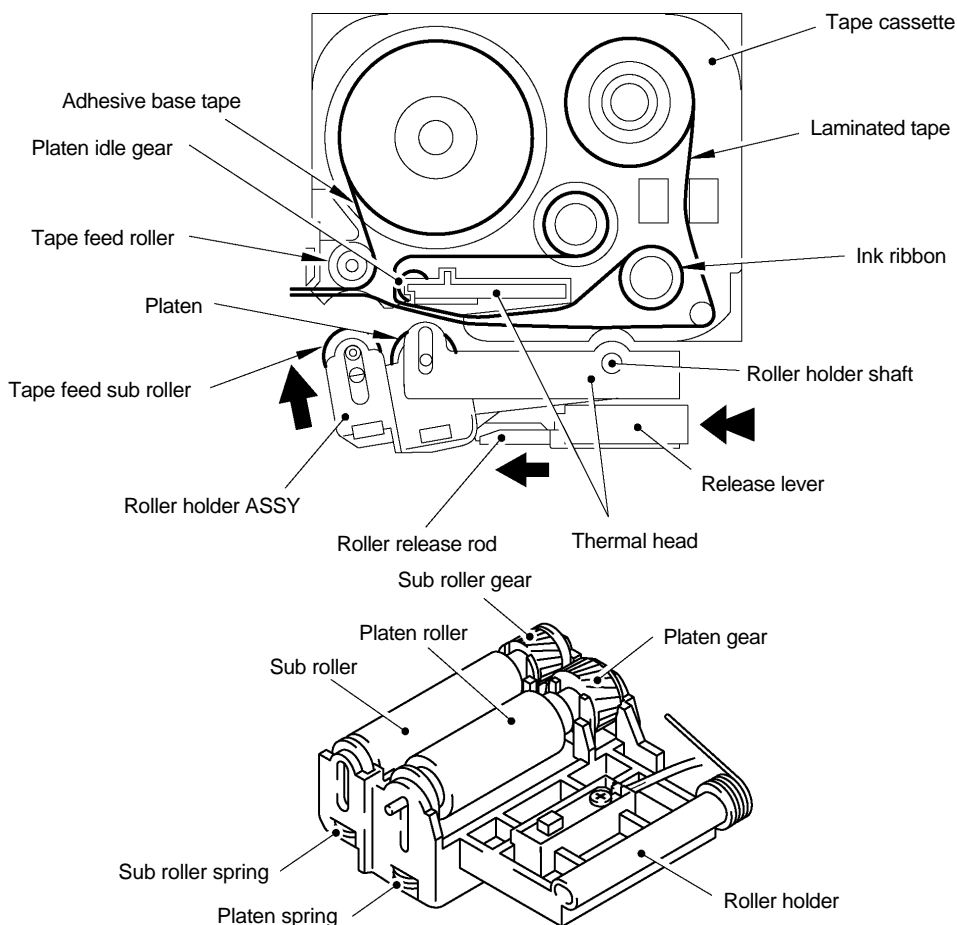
Roller Holder ASSY Setting & Retracting Mechanism
